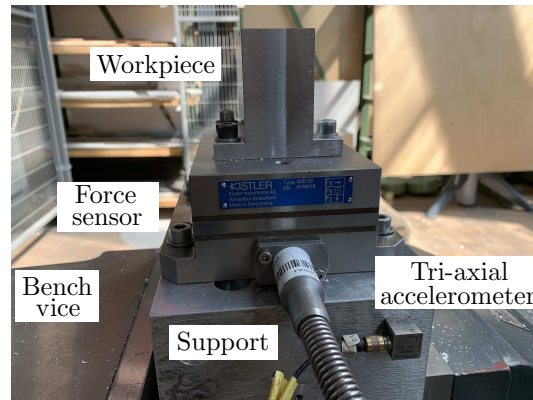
Actual set-up of the workpiece bolted on the force sensor
